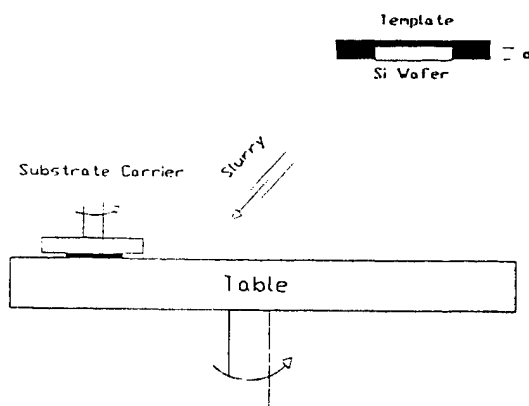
Schematic of the CMP equipment, inset shows the template assembly.
